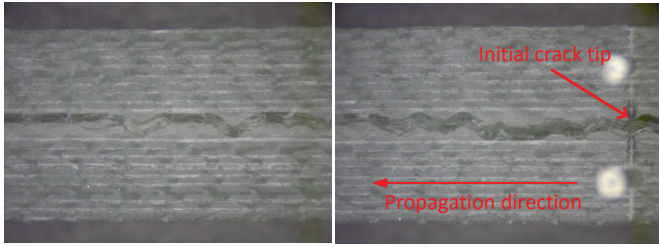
Fractographic inspection of delamination crack in layup design 1, with width of $W = 30\text{mm}$, off-angle $\theta = 90^\circ$, and mode I loading. Initial crack tip and crack growth direction are marked on the specimen.
